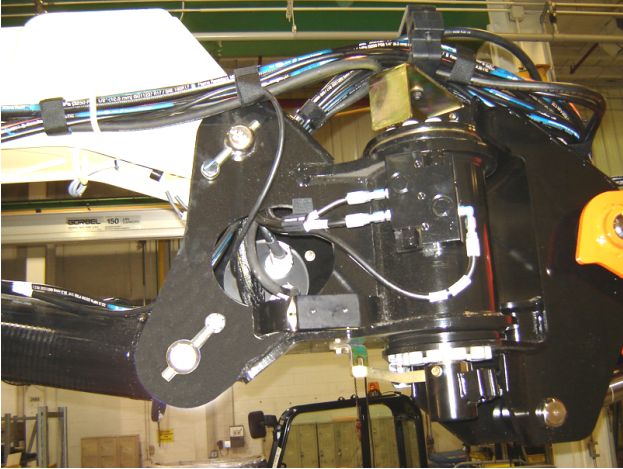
Jib Hydraulics - Sheet 7 of 7
